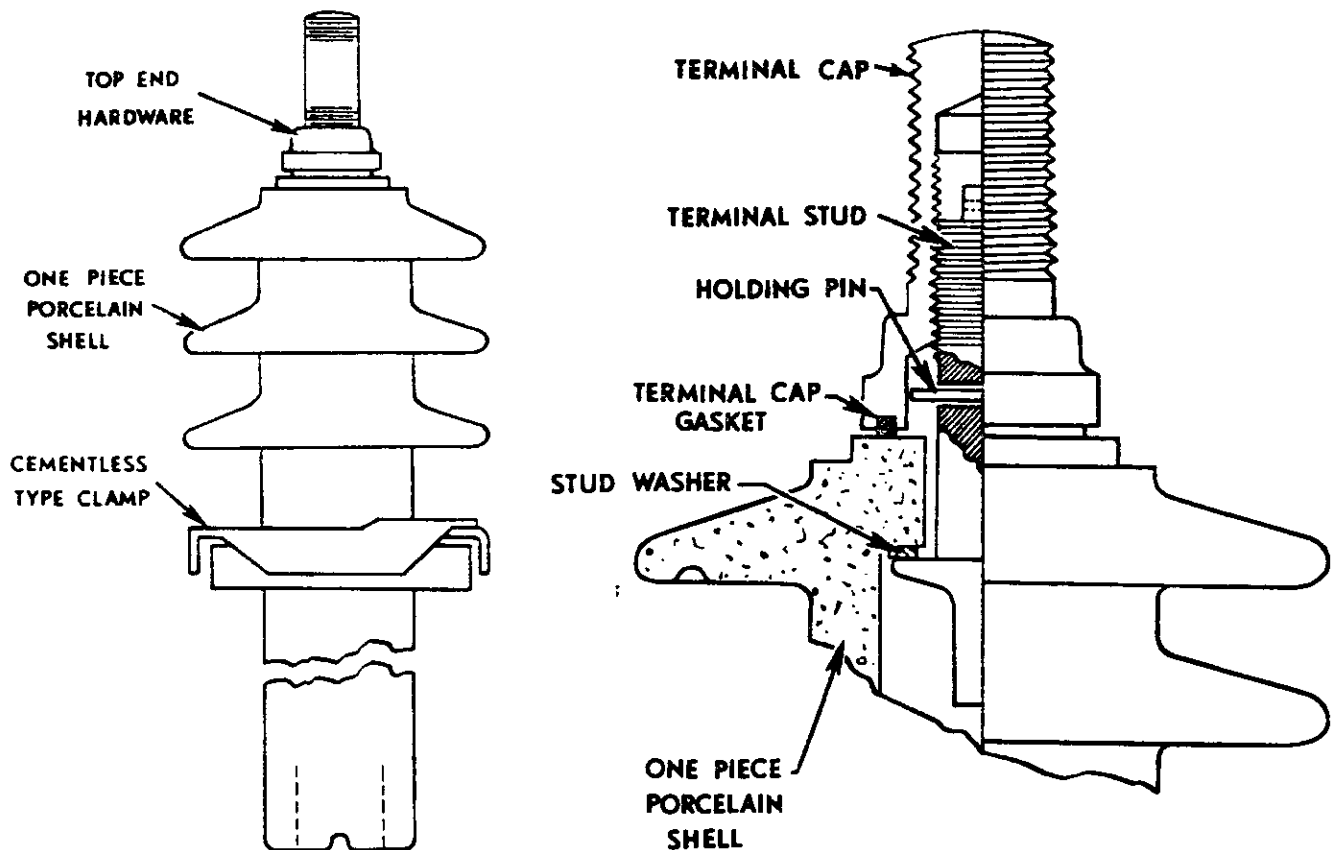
Type A bushing with detachable cable (600 amperes and below)
